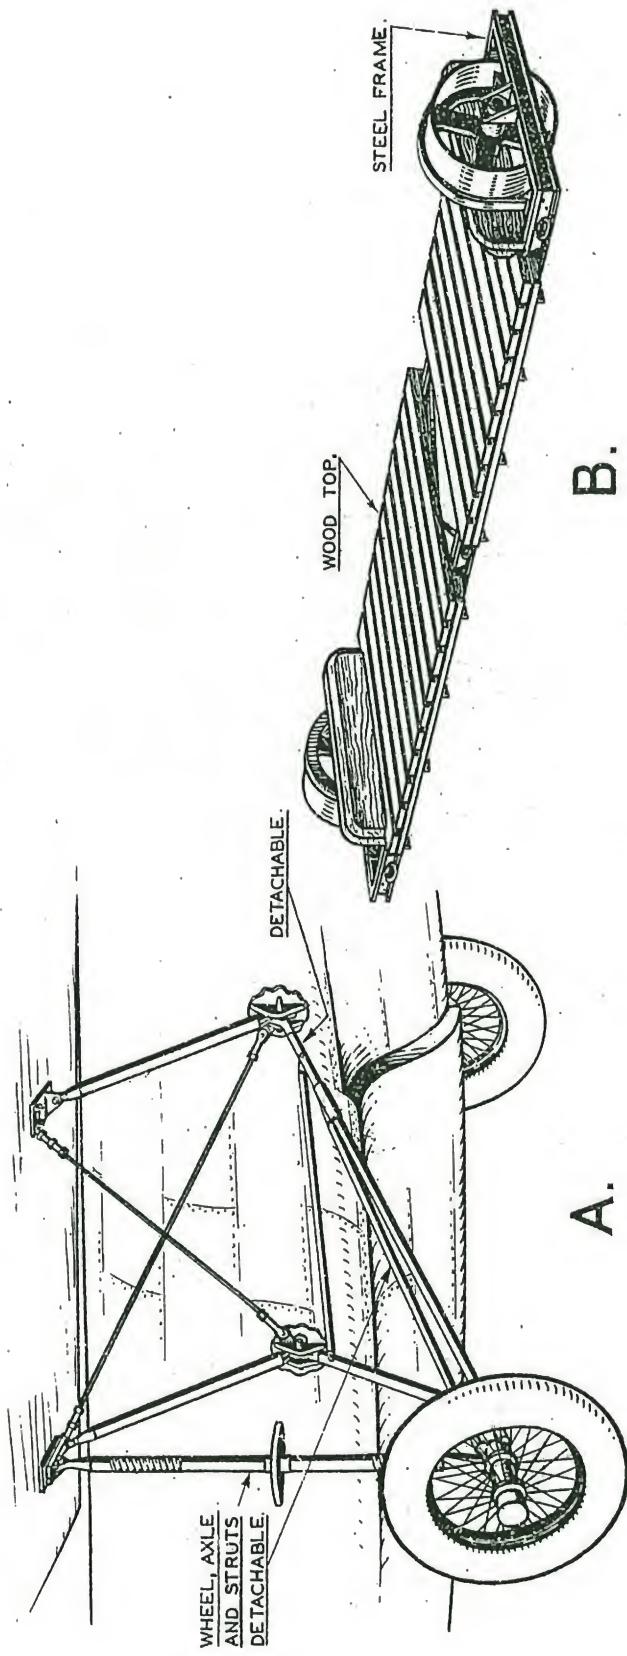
LAUNCHING CHASSIS AND BEACHING TROLLEY.
